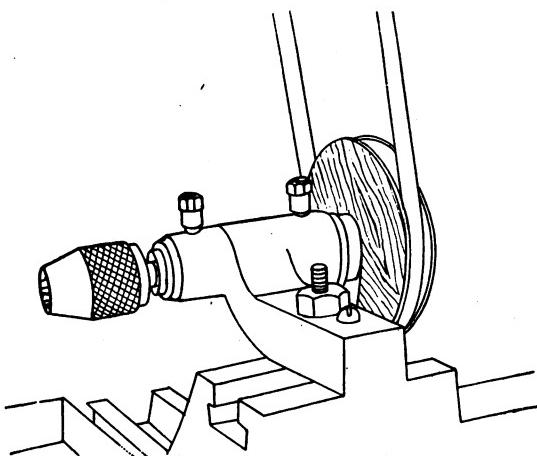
A drilling attachment for a shop lathe. This can also be used for grinding
